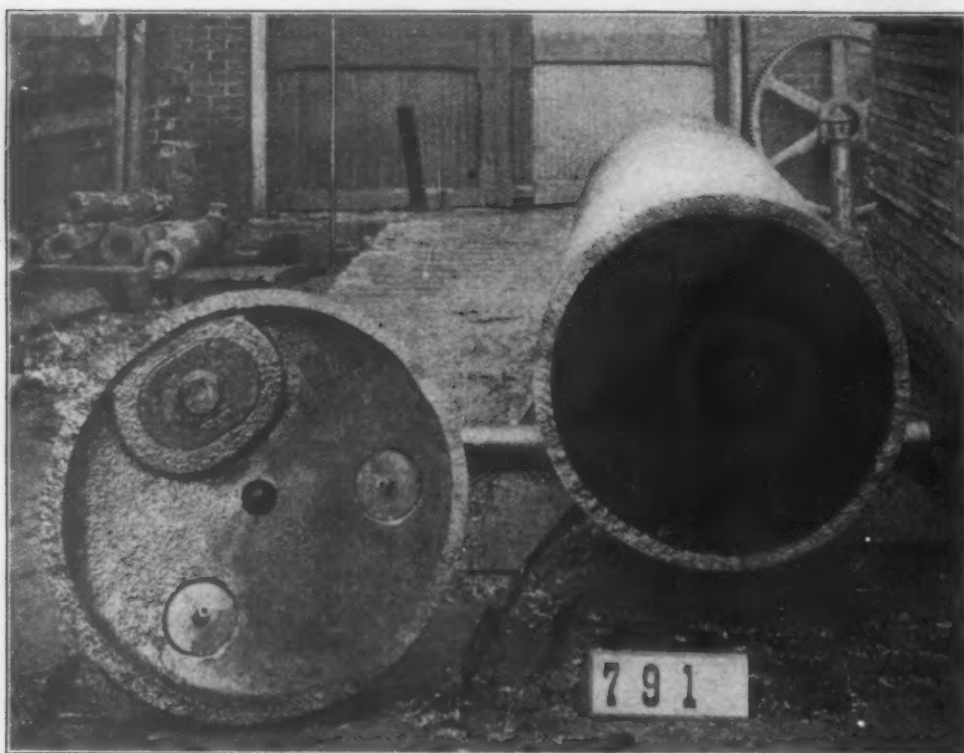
This 30-In. Dryer Roll Withstood 1250 Lb. Per Sq. In. Hydraulic Pressure Before Bursting. Note the uniformity of metal section. The core is removed through the large manhole shown. This test was conducted in the presence of representatives from the Traveler's Indemnity Co. and the American Laundry Machine Co.
